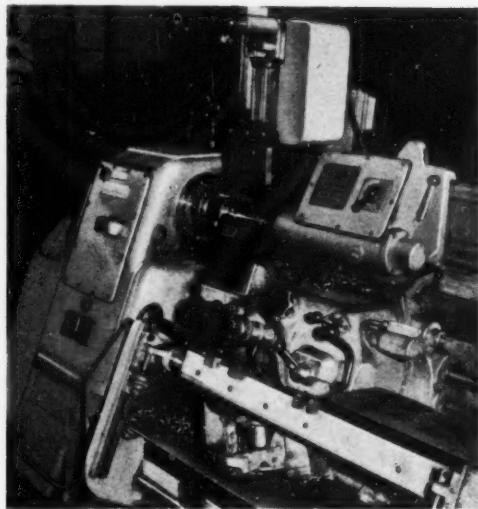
This +GF+ Type KDM 11 Copy-turning Lathe is Employed to Machine the Forgings to the Dimensions Indicated in Fig. 5.
